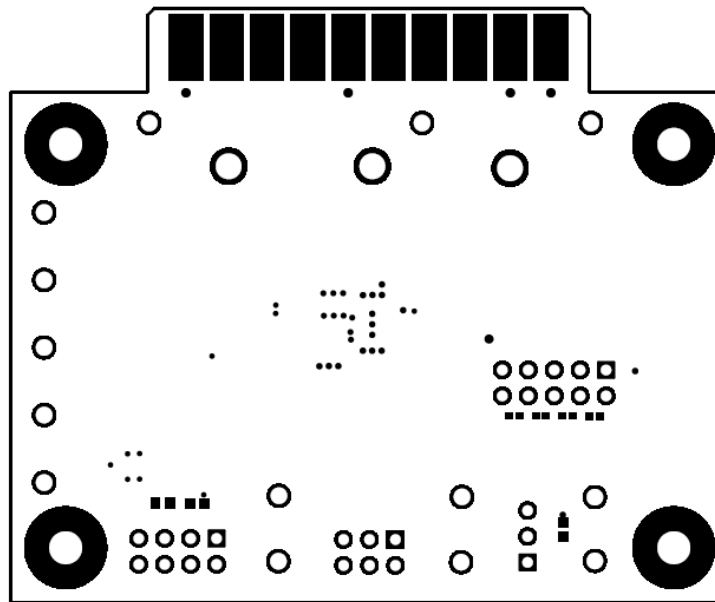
Adjustable Output Board Layout - Bottom Soldermask
